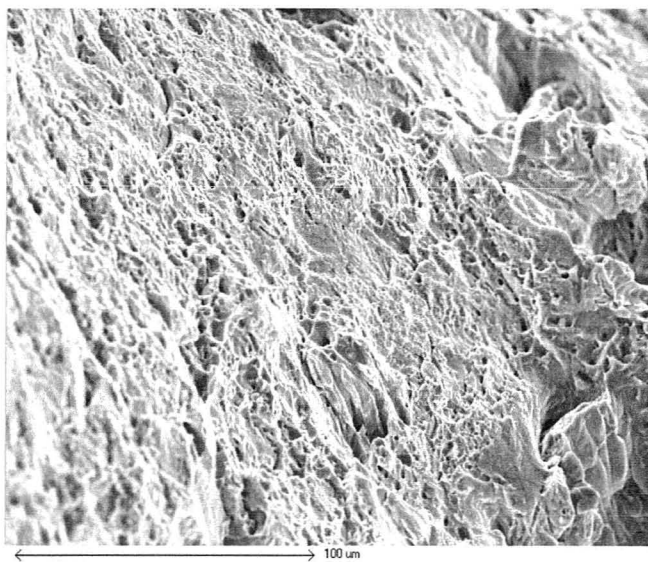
Fracture Surface for 4.11at% Mg sample, 78K test, 526x magnification
